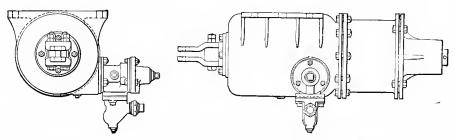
Brake Cylinder, 12 in. by 8 in., and Auxiliary Reservoir Combined, with Standard Triple Valve.
